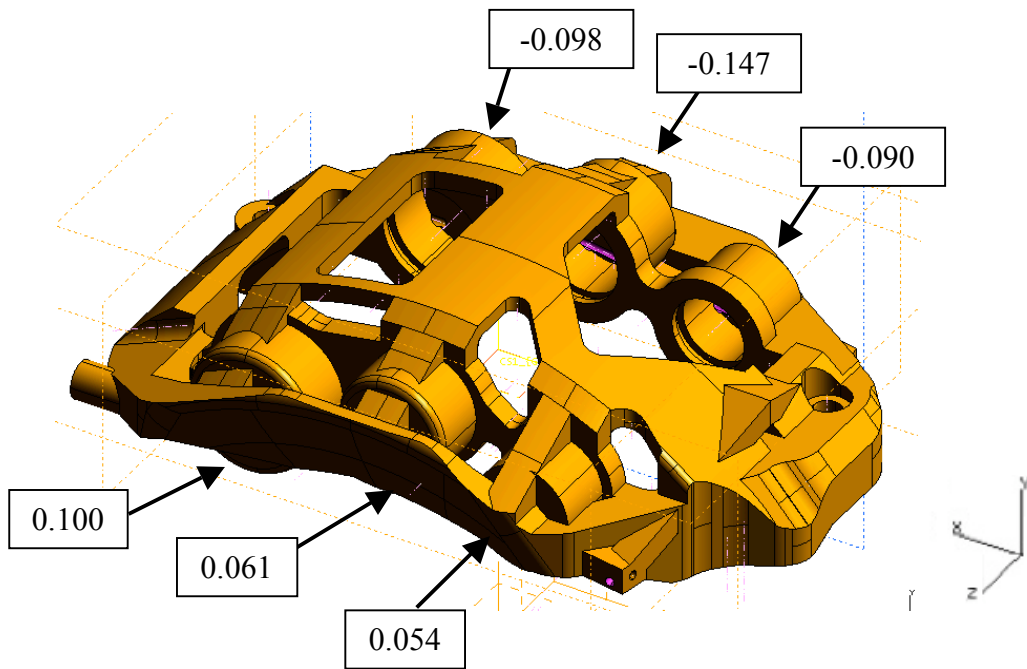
TFD caliper, piston bore displacement in the "z" direction (mm)
